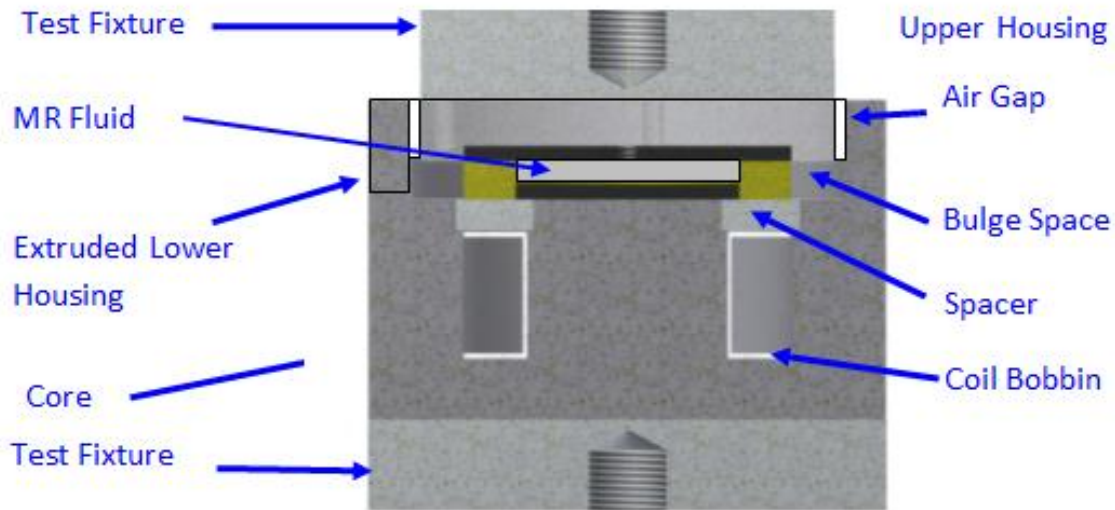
Isometric view of mount and magnetic system design, adapted from [11]
